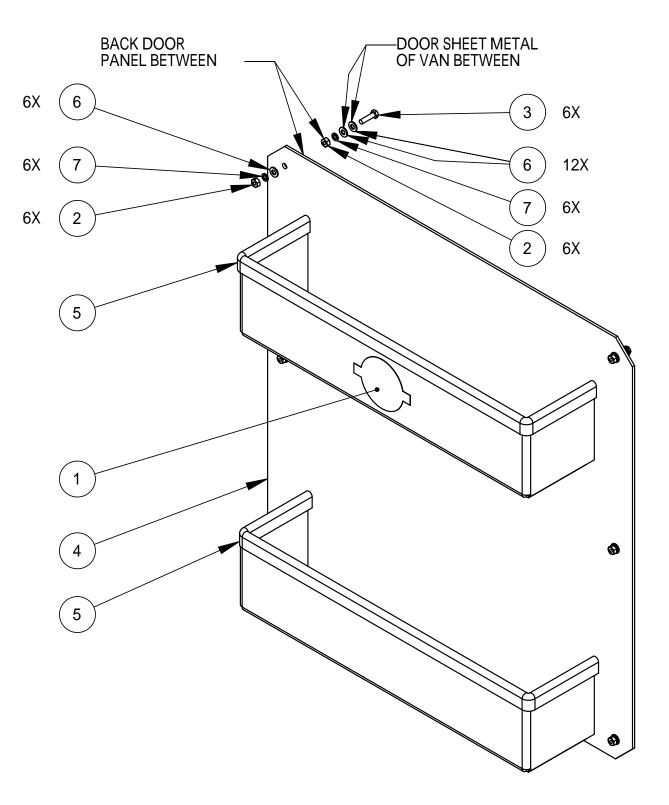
Furniture Pad Holder Assembly 000-163-015 Rev. B
